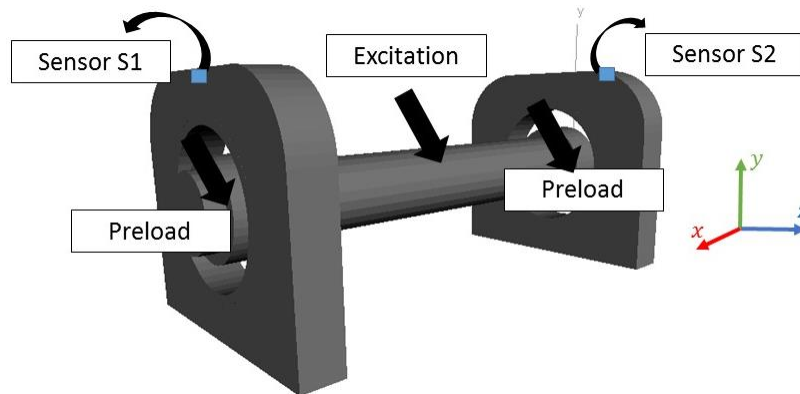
eMBS shaft-bearing-housing model in Simpack
